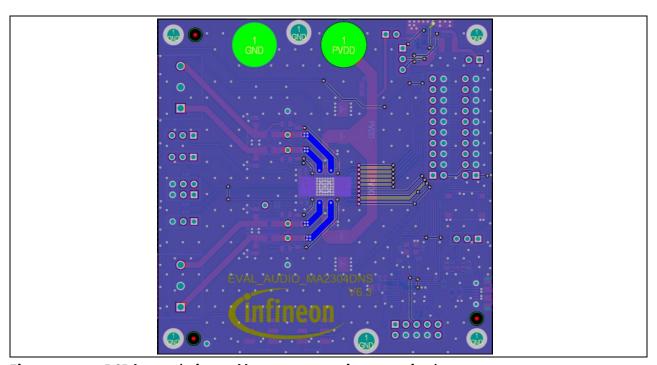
PCB layout (mirrored bottom composite x-ray view)
